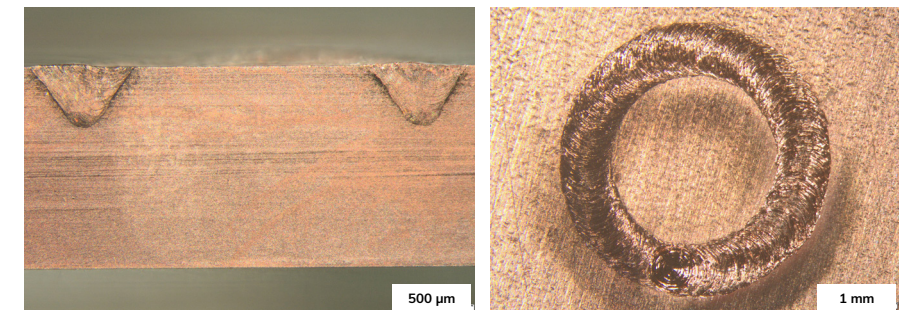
Busbar welding with copper sheets measuring 0.5 by 2 millimeters: a consistent penetration depth in a welding time of just 0.42 seconds.
